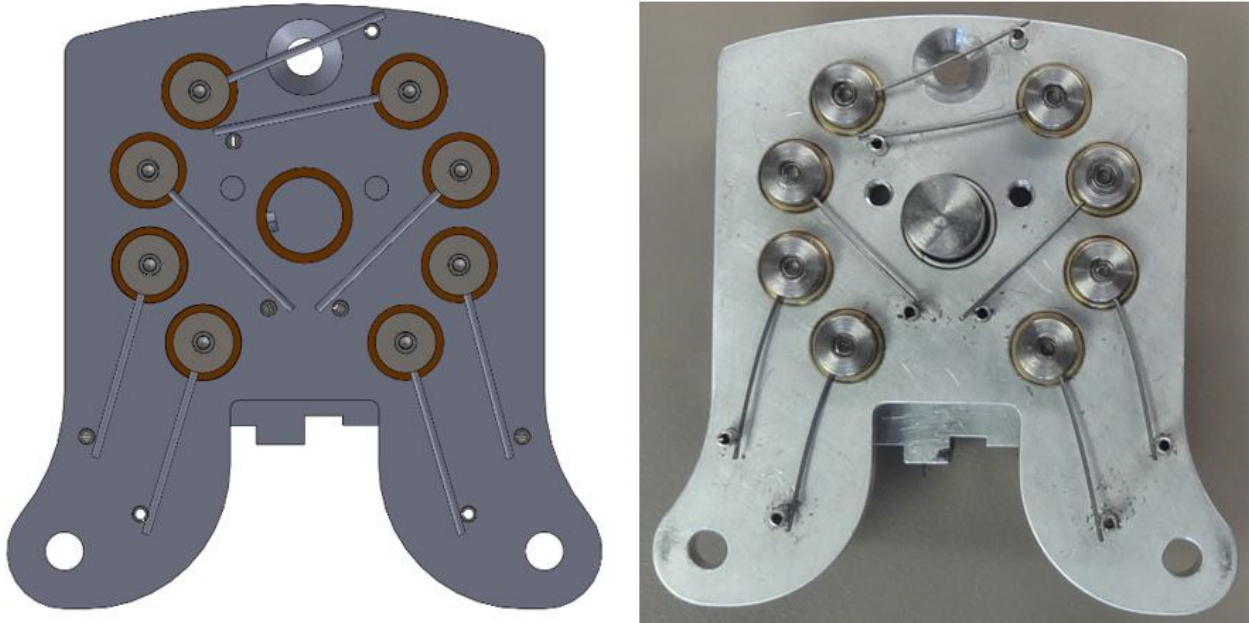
View of CAD (left) and manufactured CCA ratchet mechanism (right) showing the music wire springs used to provide a moment about each of the eight pawls. When the ratchet mechanism was in a locked state, the pawls were engaged with the ratchet gear, the pawl release arm was in a down position, and the springs were not deformed and were providing no moments. When the ratchet mechanism was in a free state, the servo lifted the pawl release arm into an up position, which rotated the pawls away from the ratchet gear (allowing it to spin freely) and also deformed each of the springs. Because each pawl was spring loaded to engage the ratchet gear, transition from the free to locked state occurred quickly (see *Table 2*).
